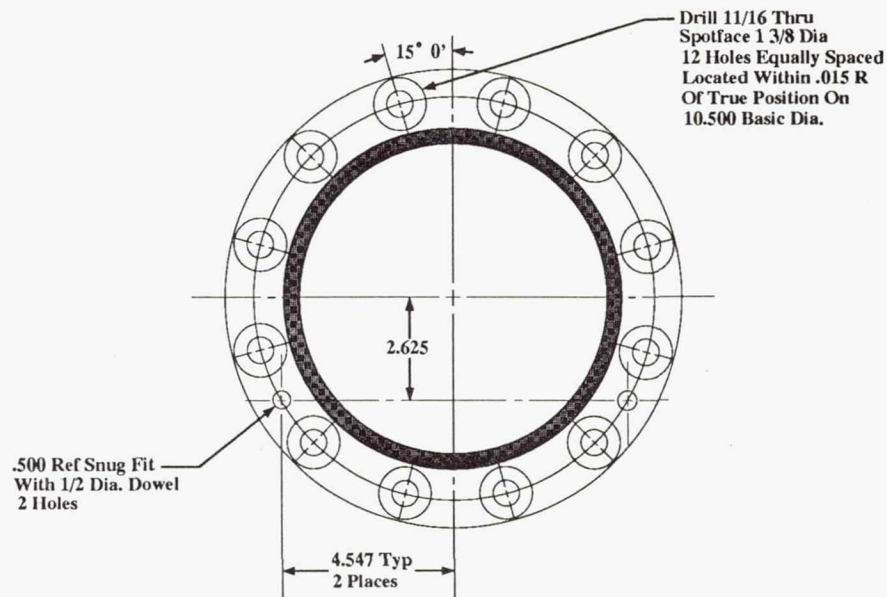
Schematic of connection to 30 in. duct. Linear dimensions are given in inches.
